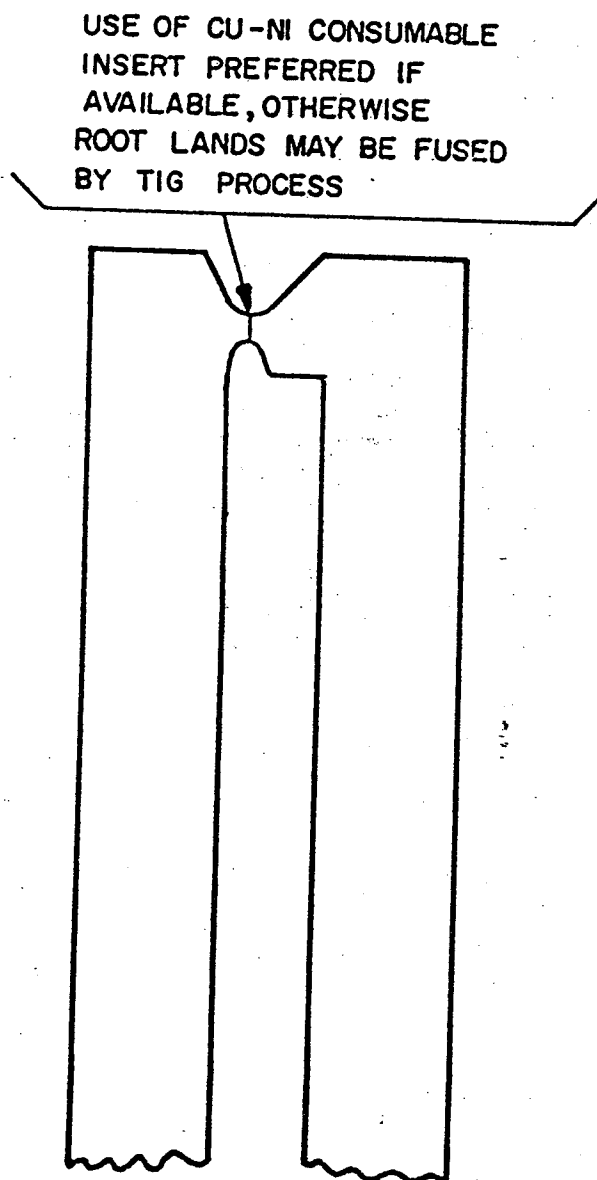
Acceptable method of welding inner and outer tube sheets - all double tube sheet cooler applications.
